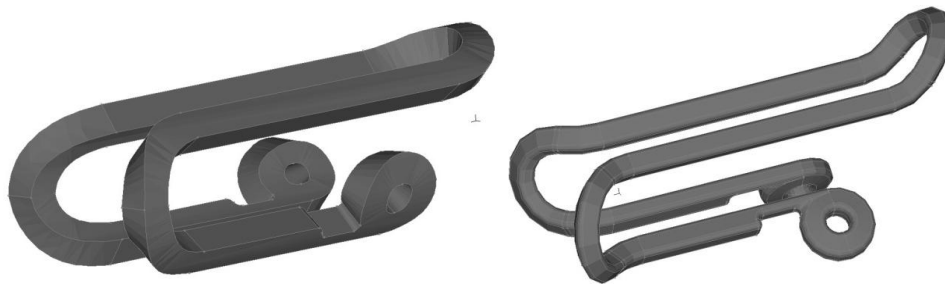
Custom stenotic devices - design D2 is shown on the left while modified version of D2 is shown on the right (D3). Dimensions for both designs: internal diameter - 4mm, thickness - 1mm, length - 17mm.
